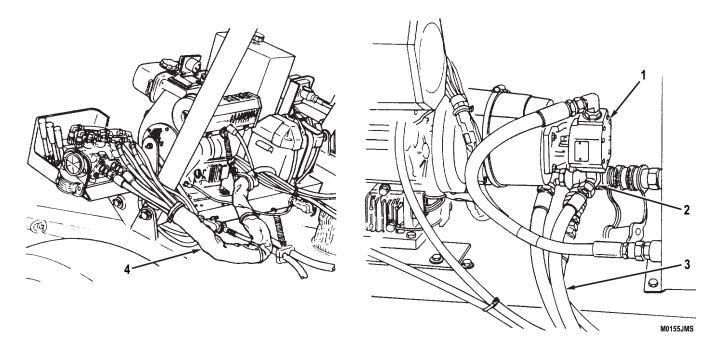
Hydraulic Pump Outlet-to-Hydraulic Control Valve Inlet Hose Removal.
